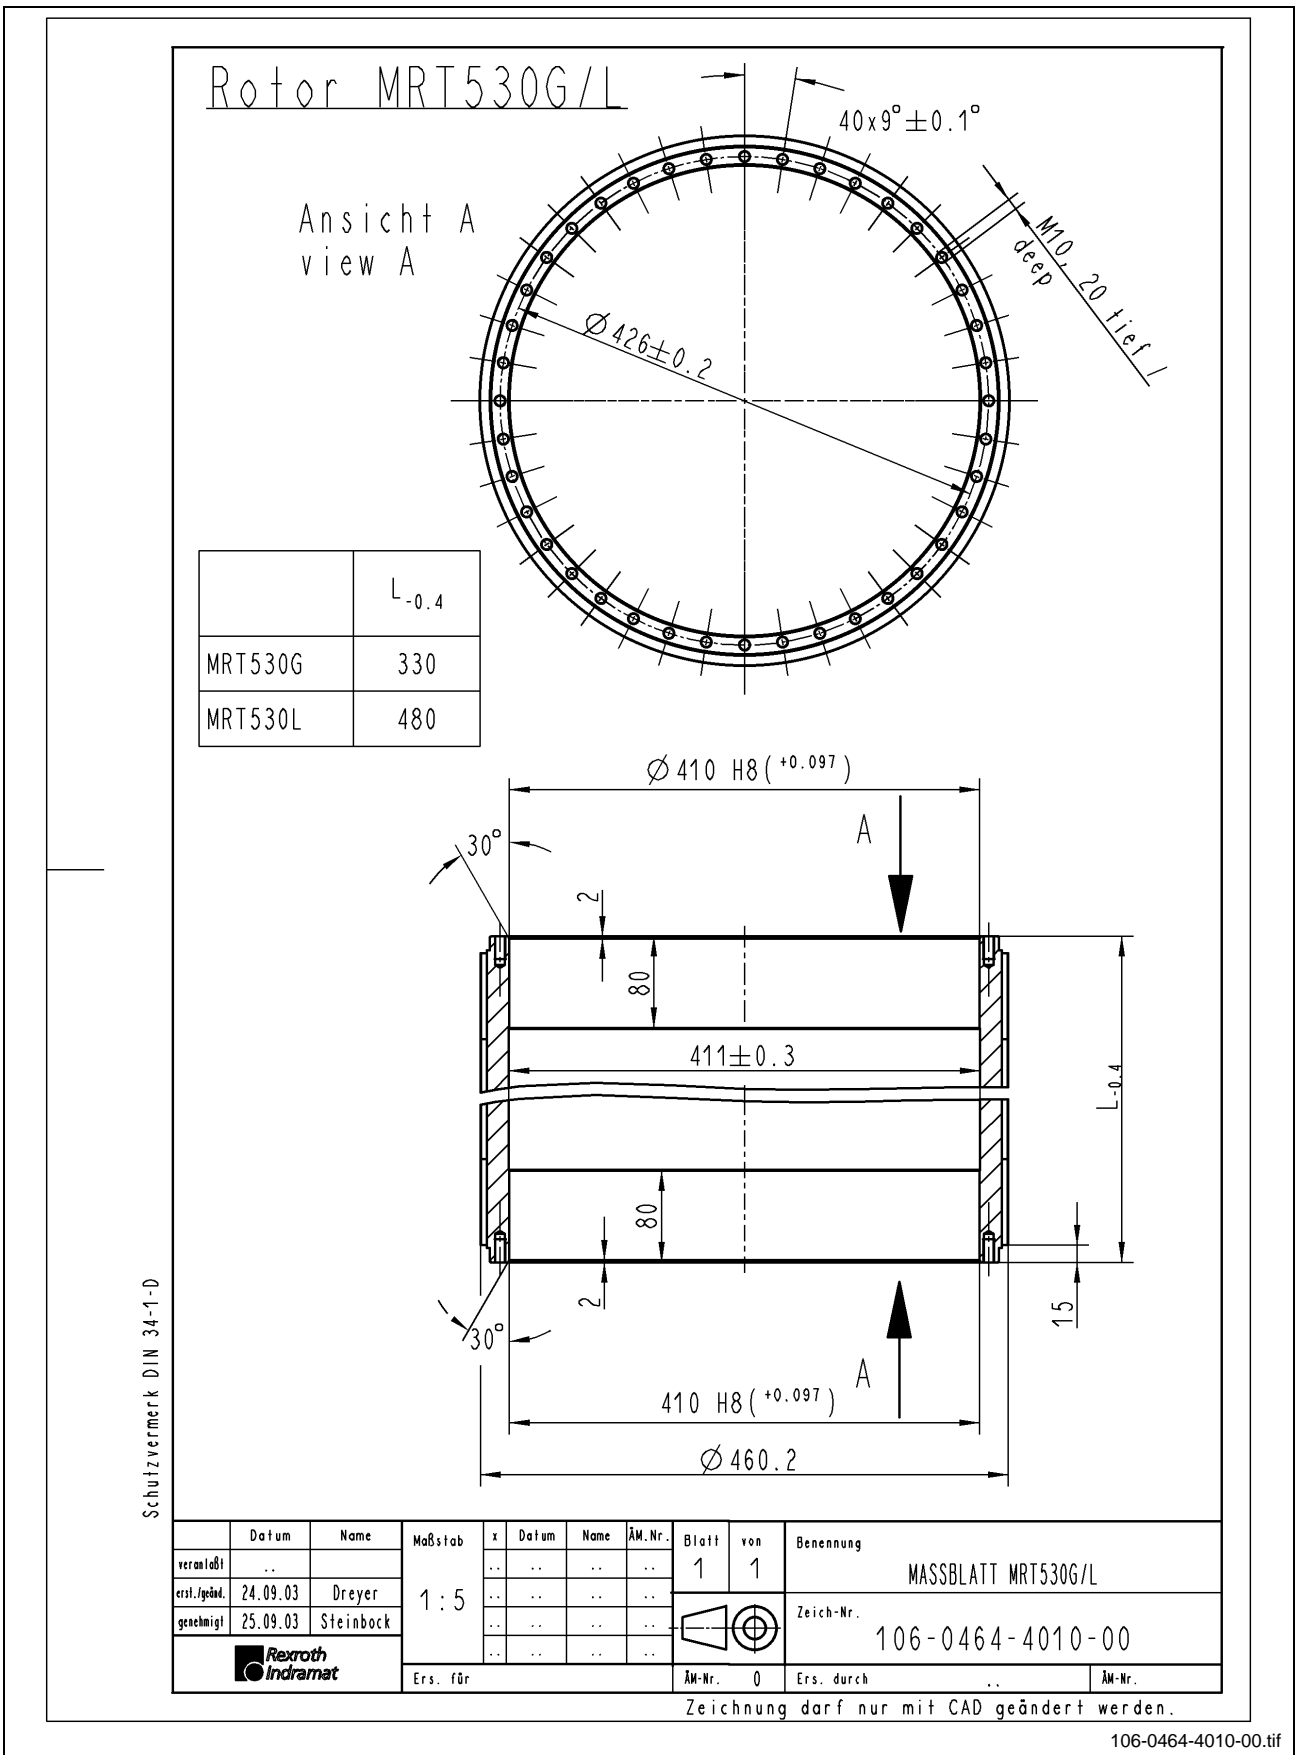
Dimension sheet, rotor MRT530G / MRT530L
